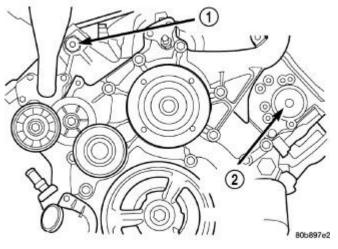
Cylinder Head Access Plugs Courtesy of CHRYSLER LLC
